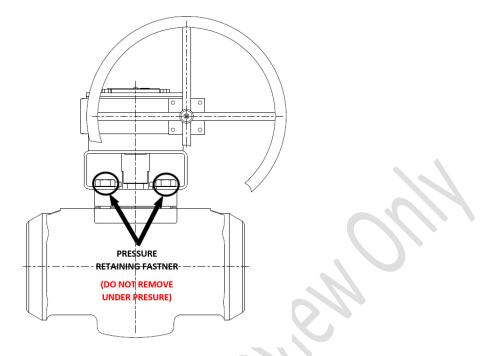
Nonconforming Method for Attaching Mounting Bracket
